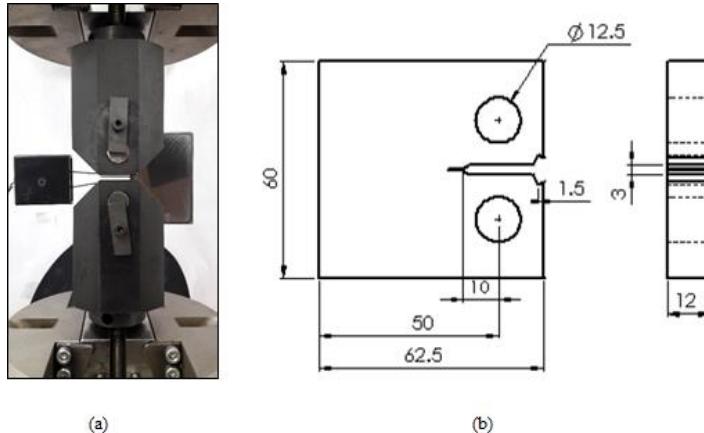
(a) Experimental setup for FCG rate test, (b) Specimen geometry used for FCG rate test (all dimensions are in millimeters)
